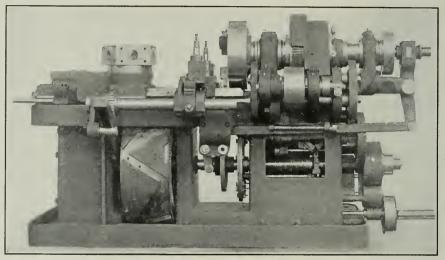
Potter & Johnston Manufacturing Automatic (Rear View)
